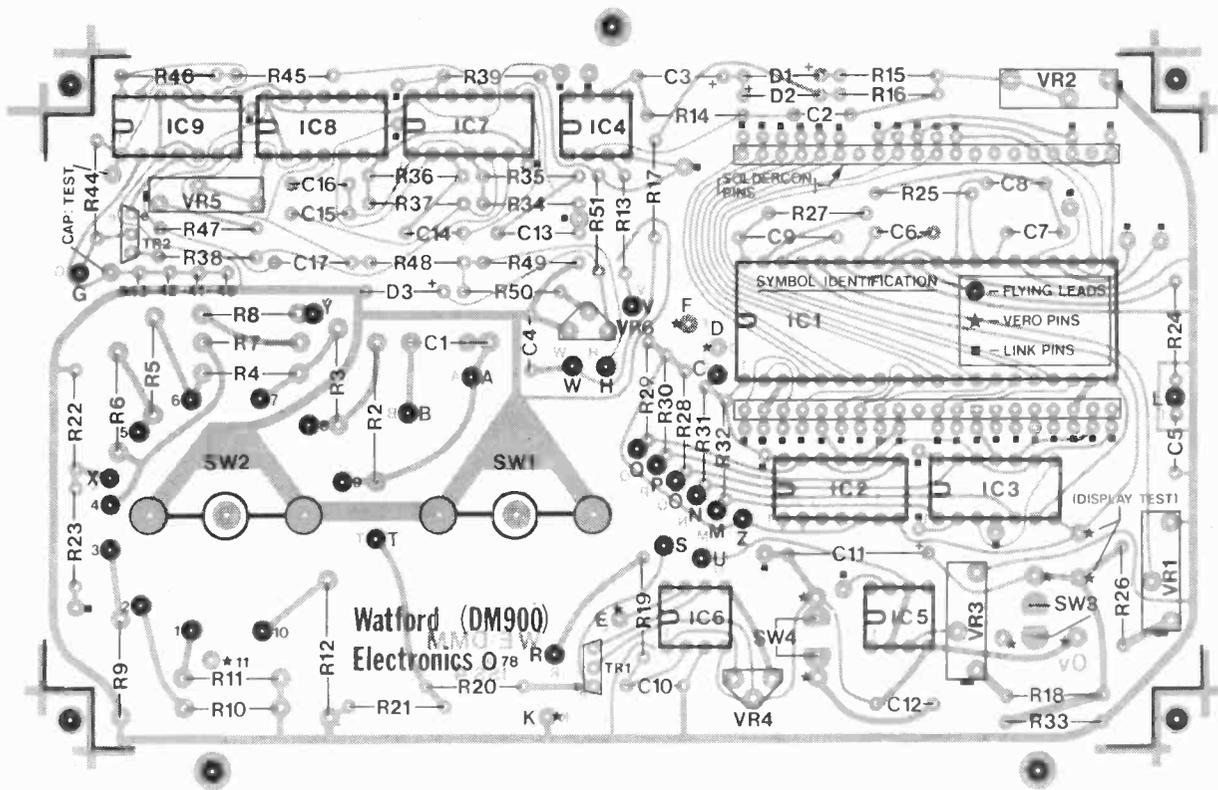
Component overlay for the DMM circuit board, points marked ■ are through board links and points marked ★ are terminal pins. Only one side of the pattern is shown for clarity.
